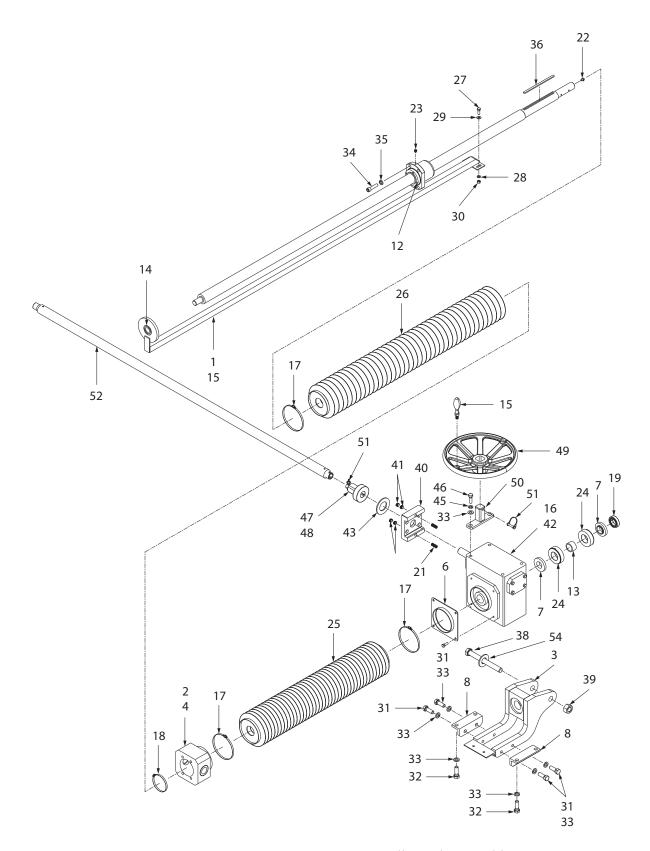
AGSE-E16626-S04 Cradle Jack Assembly
